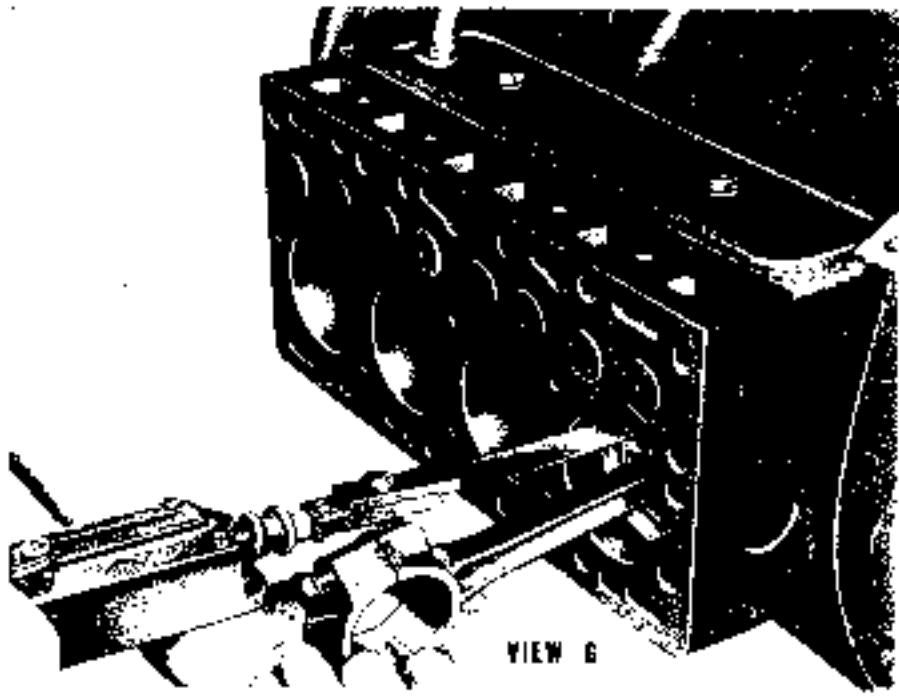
Fitting Continental N62 piston. Use 1/4 inch wide feeler, .0015 thick. Correct fit requires 5-10 pounds pull.
